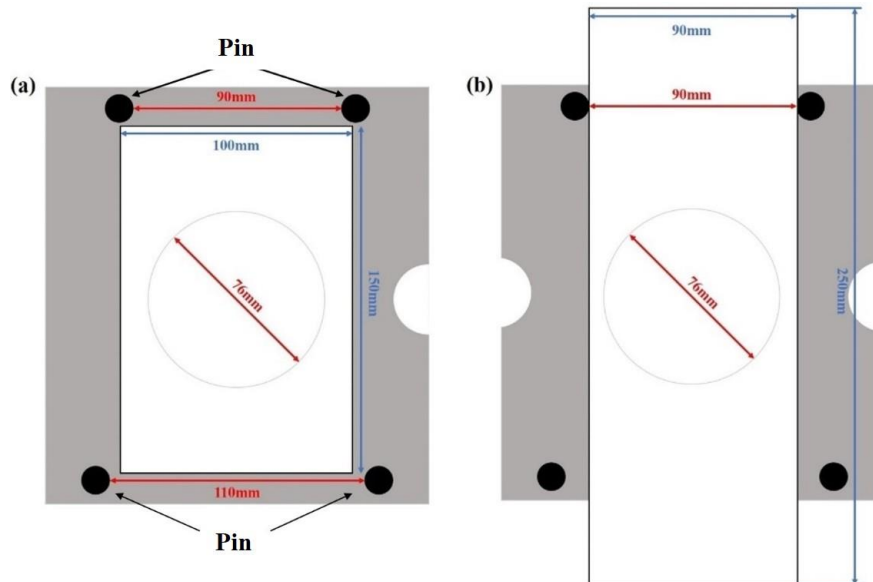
Schematic illustration of adaptation of specimens to fixture of impact tower: (a) specimens with dimensions of L150×W100 mm; (b) L250×W90 mm
